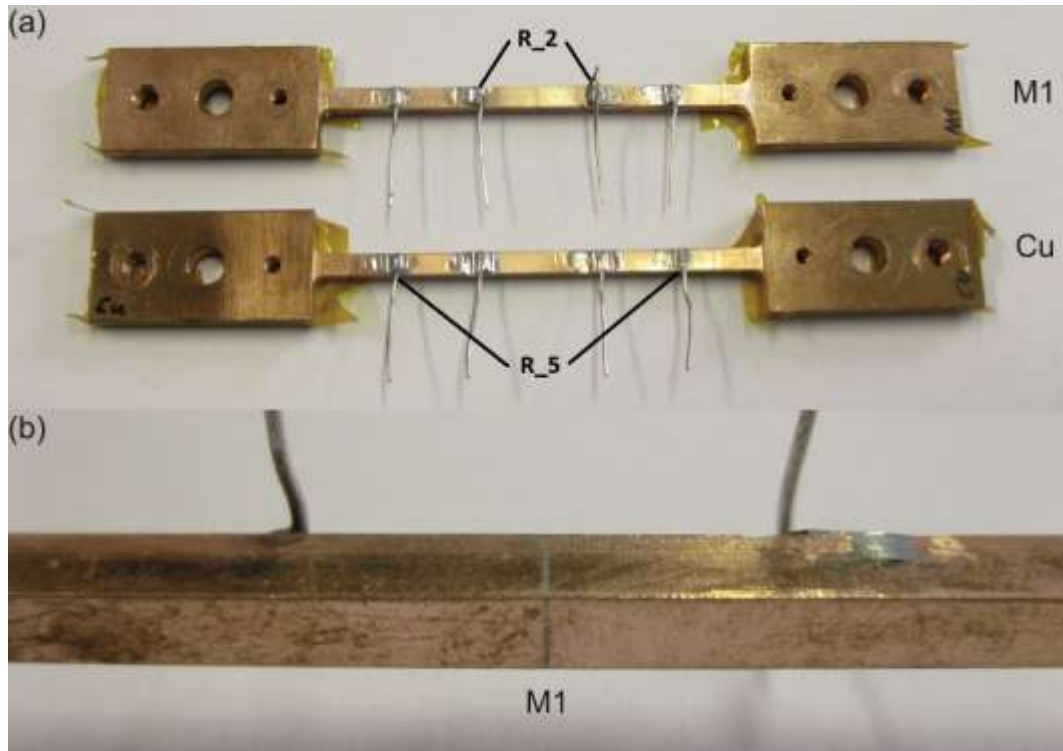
(a) Instrumented butt-splice samples M1 (machined MOB sample) and Cu (machined pure copper). (b) Detail view of M1 solder connection.
